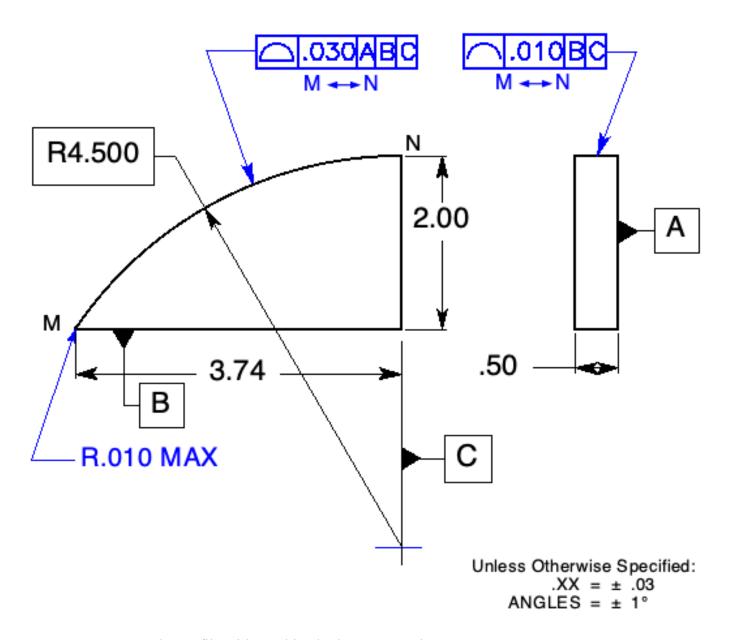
Control a profile with combined tolerances: Prob. 5.
